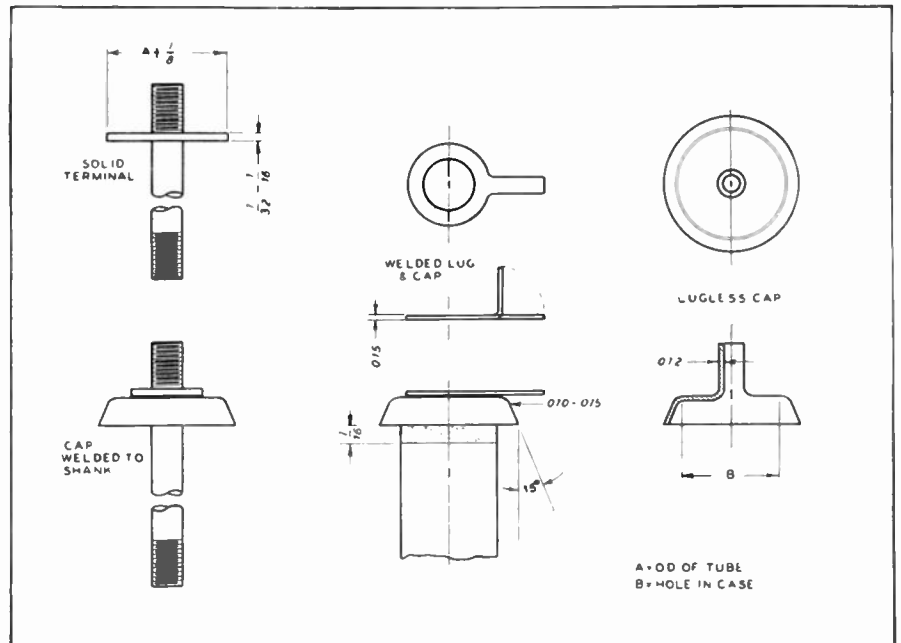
SUGGESTED METHODS FOR MOUNTING BUSHINGS ON METAL COVERS, AND FOR TERMINAL DESIGNS USING SOLID RODS FOR CONNECTIONS
